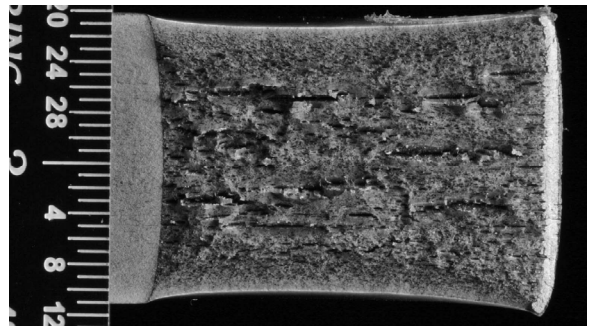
Fracture surfaces from several early vintage TC128-B materials.
